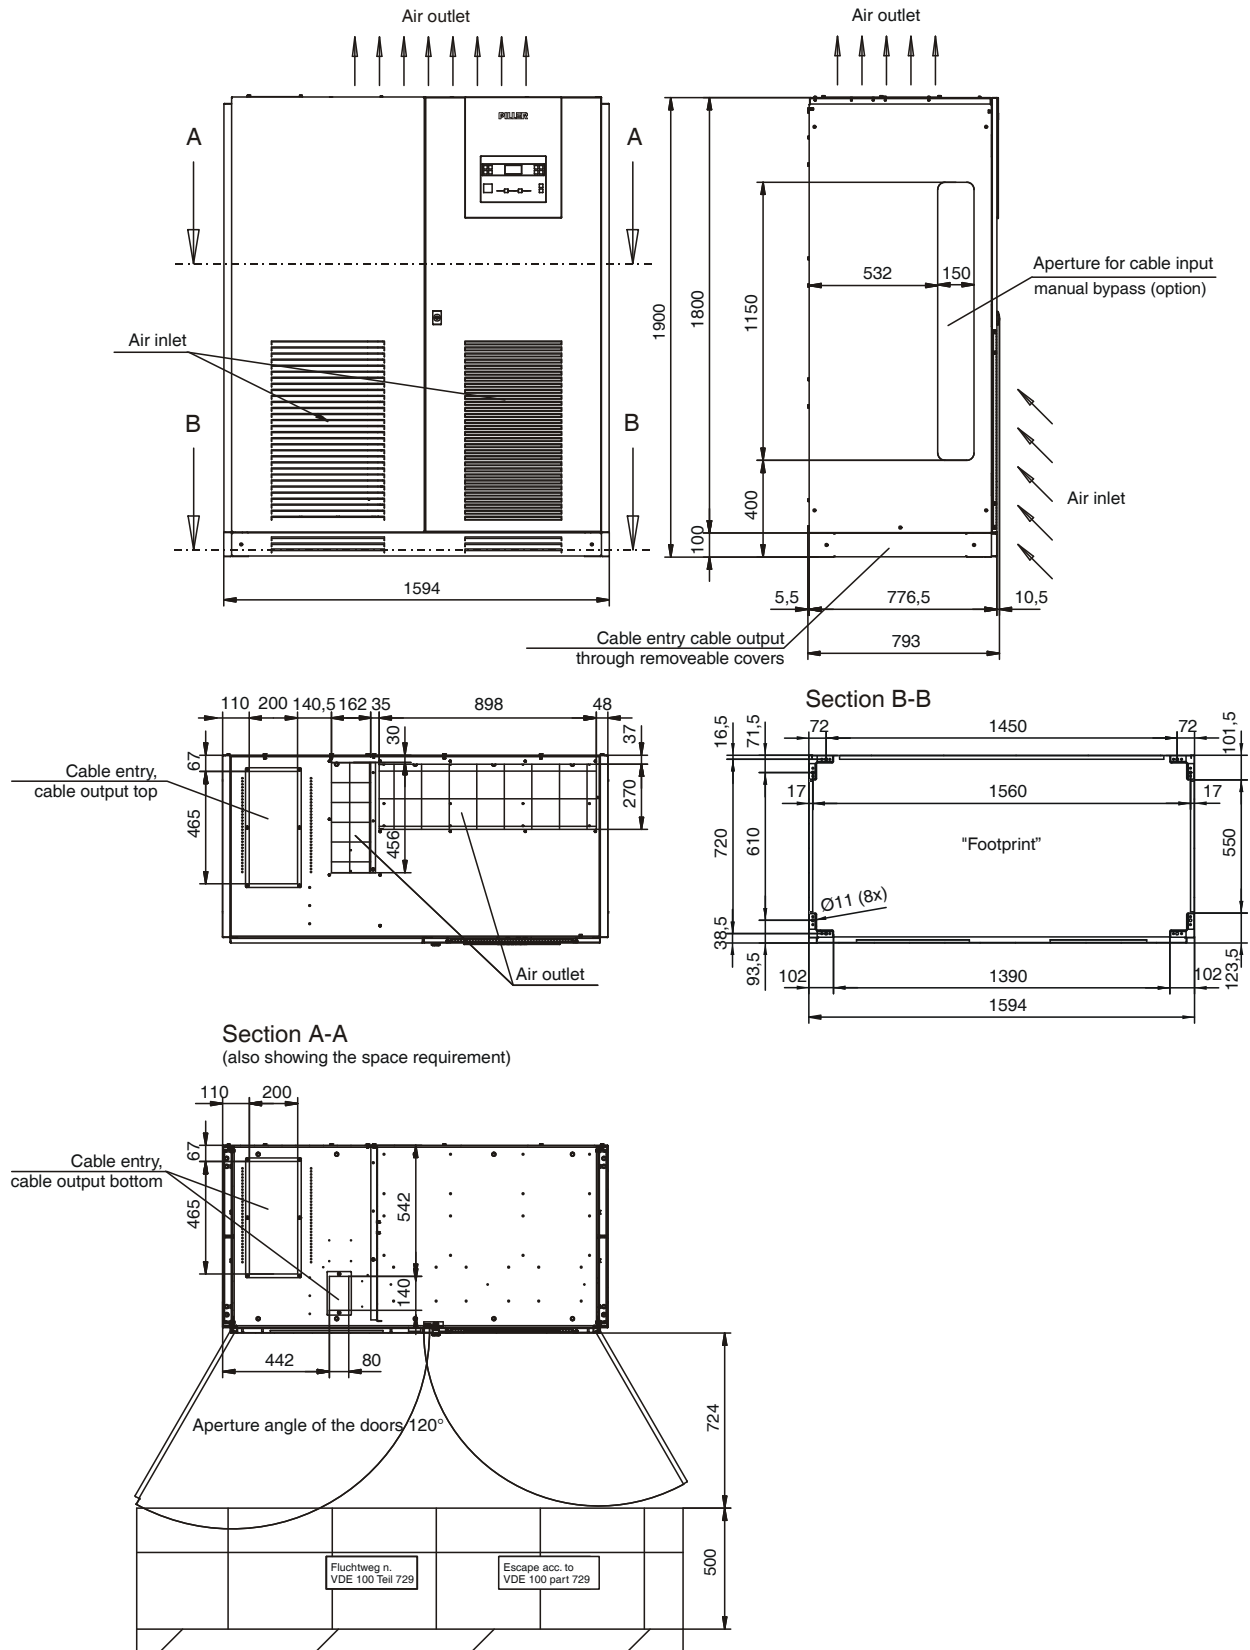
APOCONV 300 kVA dimensions and space requirements
